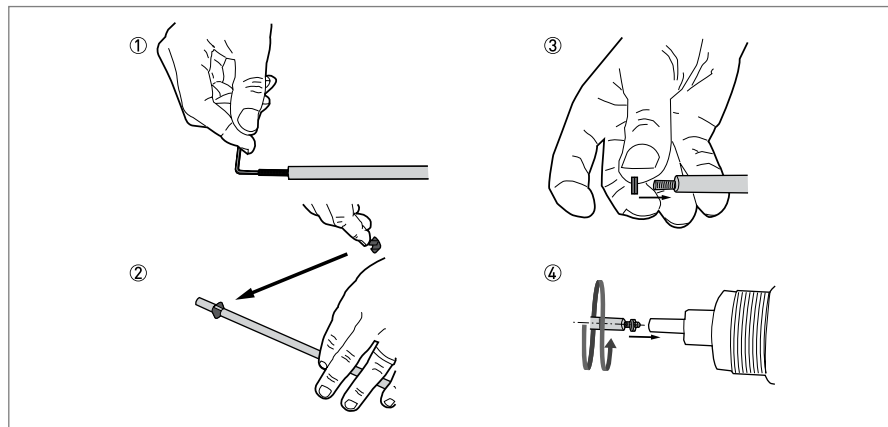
Assemble the Segmented Coaxial Probe Part 1
